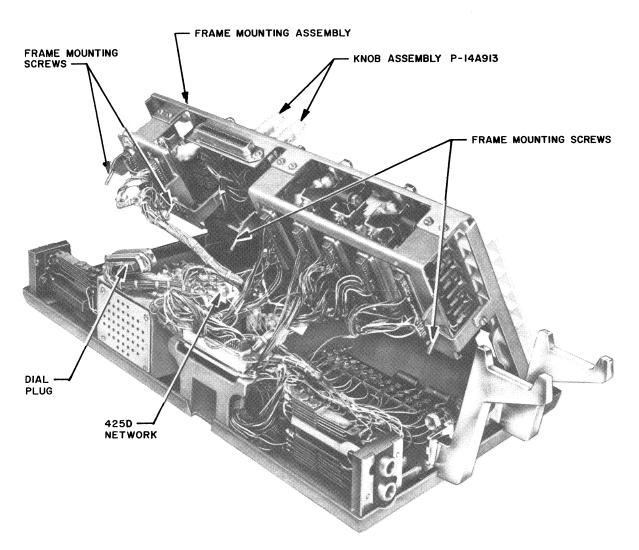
1A-Type Telephone Console, Frame Mounting Assembly Raised
